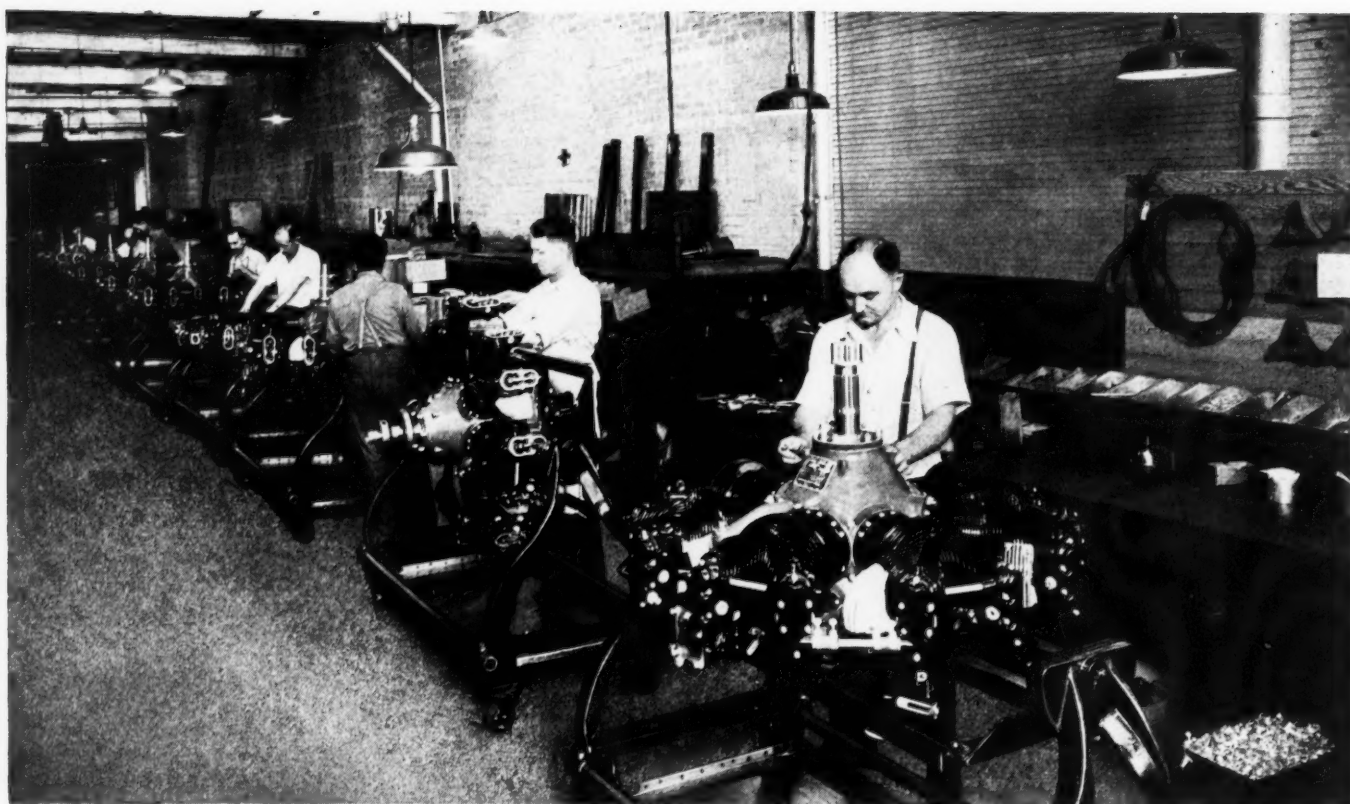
General View of an Assembly Line at the Continental Motors Corporation which Turns out Gasoline-driven Radial Air-cooled Engines for the Operation of Army Tanks
